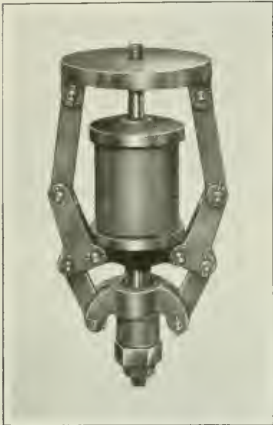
Press Attachment made by the E. W. Bliss Co.
